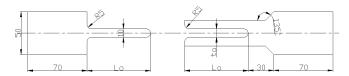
Tongue and groove geometry configuration and dimensions (mm).
